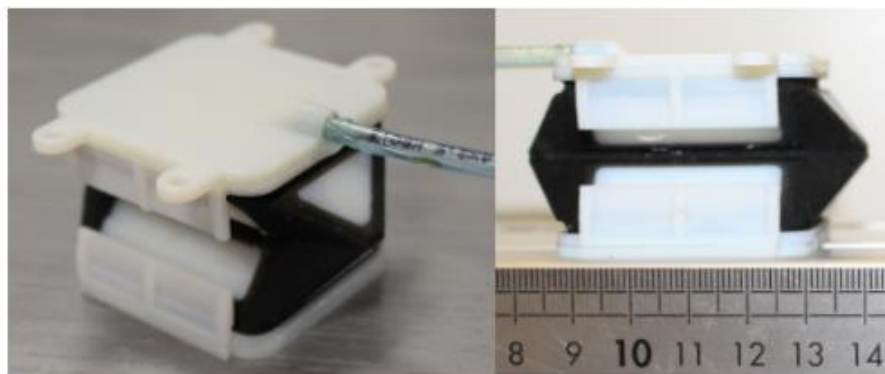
A prototype of origami-inspired flexible pneumatic actuator manufactured using multi-material 3D printing [14].
